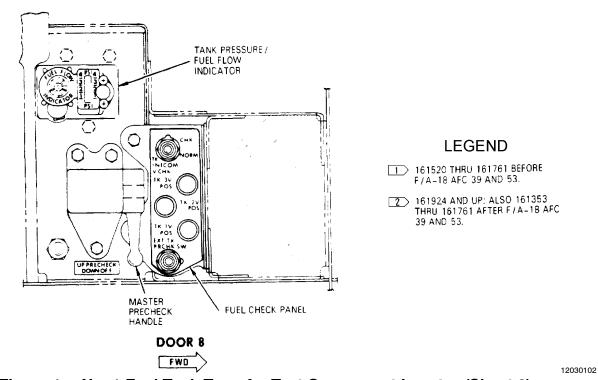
No. 1 Fuel Tank Transfer Test Component Locator (Sheet 2)
